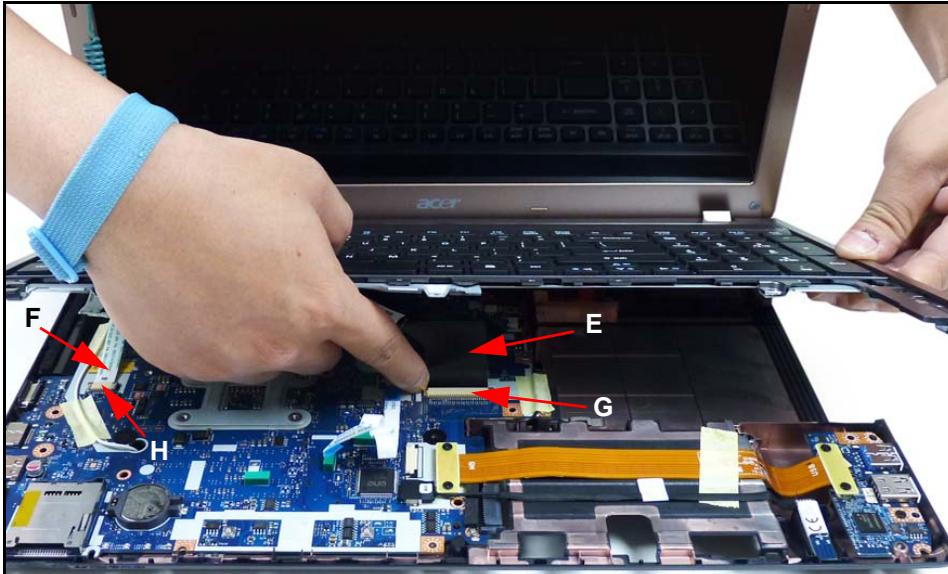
Exposing Keyboard FPC and Power Board FFC
